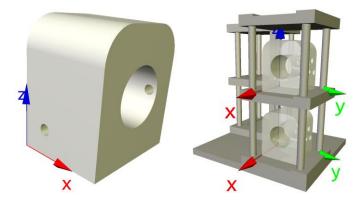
(a) *Workpiece datum* on the back of a workpiece; (b) *Nest datums* of two nests of a fixture (with the workpiece being transparent).
